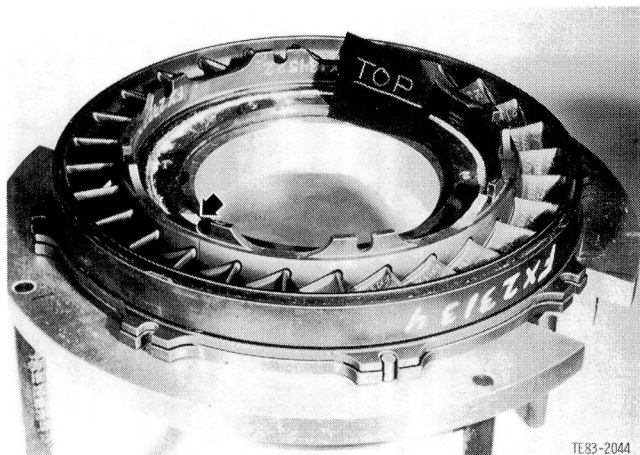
Ceramic nozzle assembly for 2070°F-configuration after testing in thermal shock rig (BU12), showing lug fractures in the inner vane support ring.
